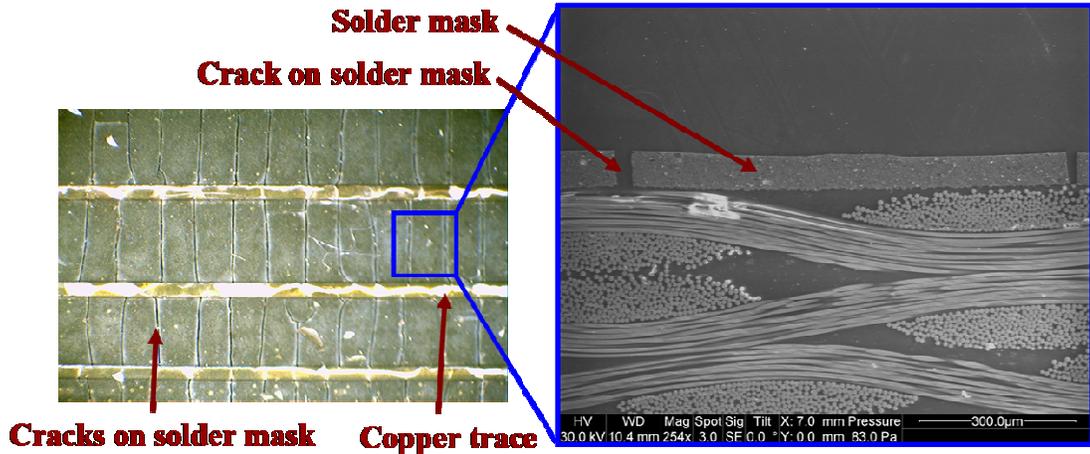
Solder mask cracks on Sn based finished SAC305 soldered board (courtesy: CALCE)
